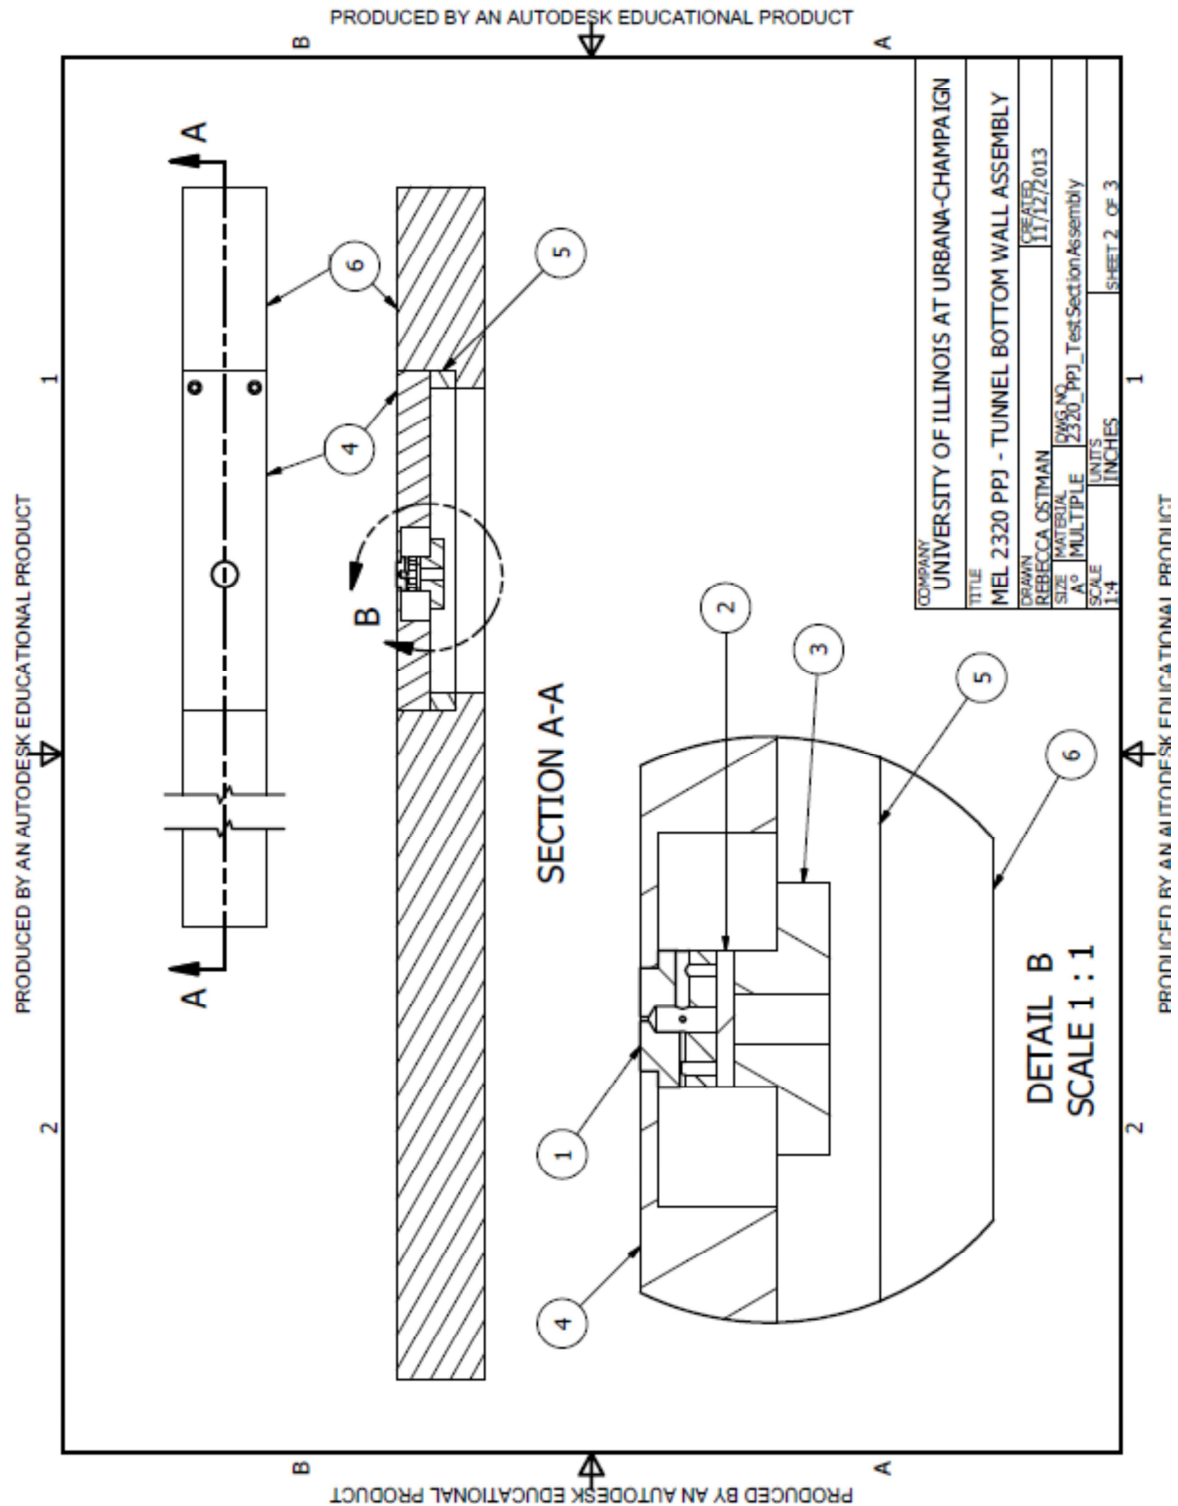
(cont.) b) cross section and detail views of PPJ assembly,
